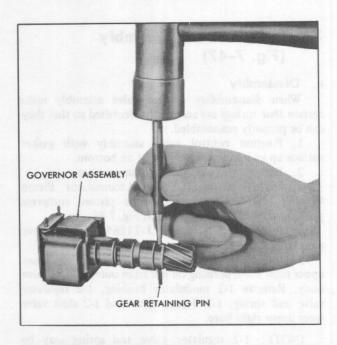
Removing Governor Driven Gear Retaining Pin
